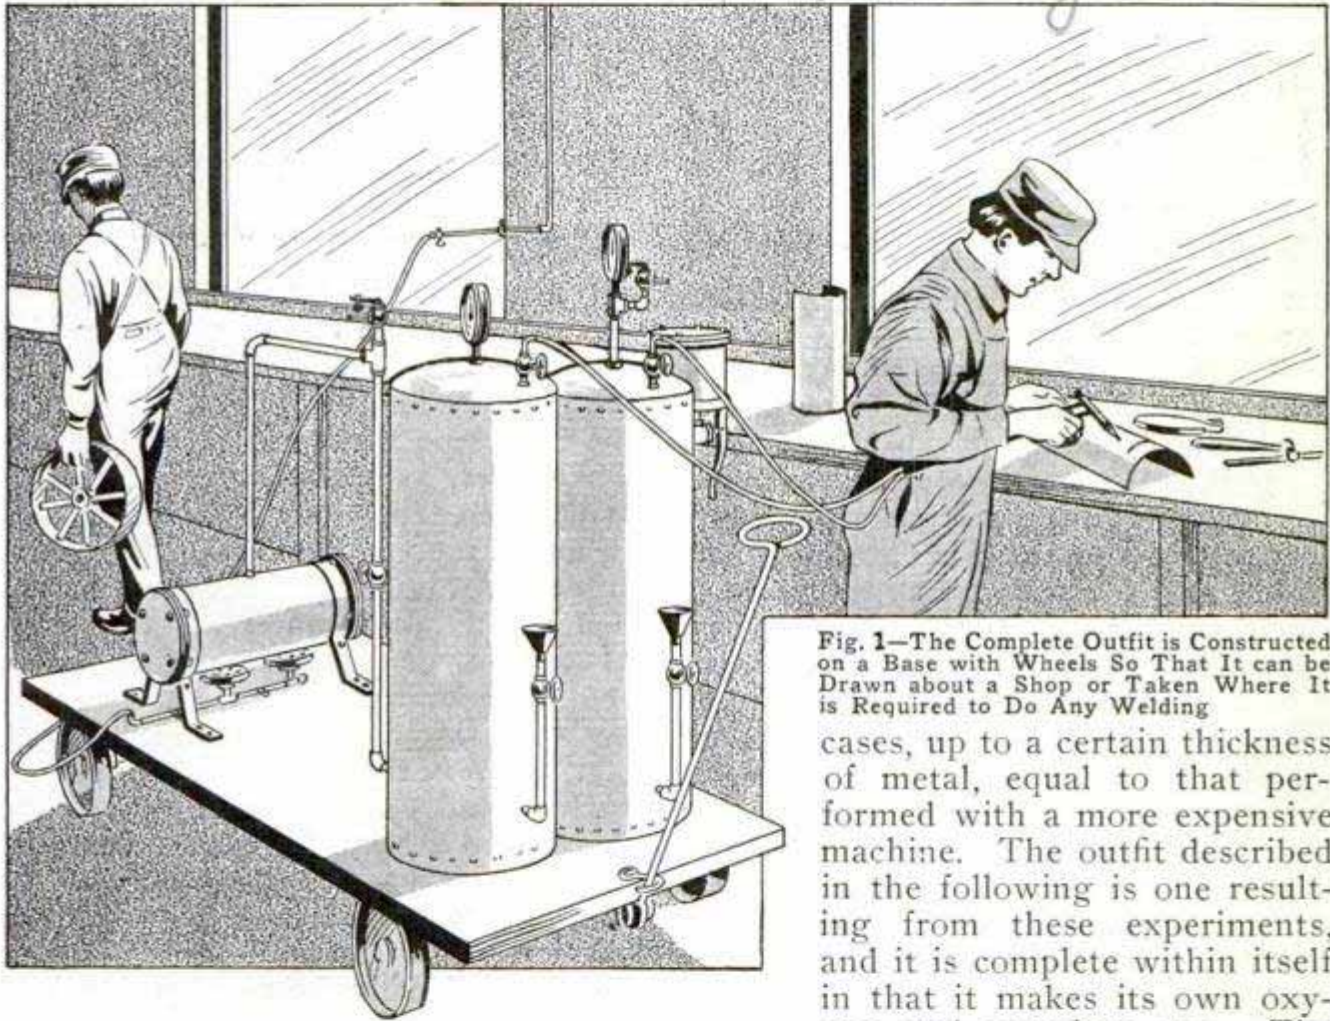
The Complete Outfit is Constructed on a Base with Wheels So That It can be Drawn about a Shop or Taken Where It is Required to Do Any Welding
